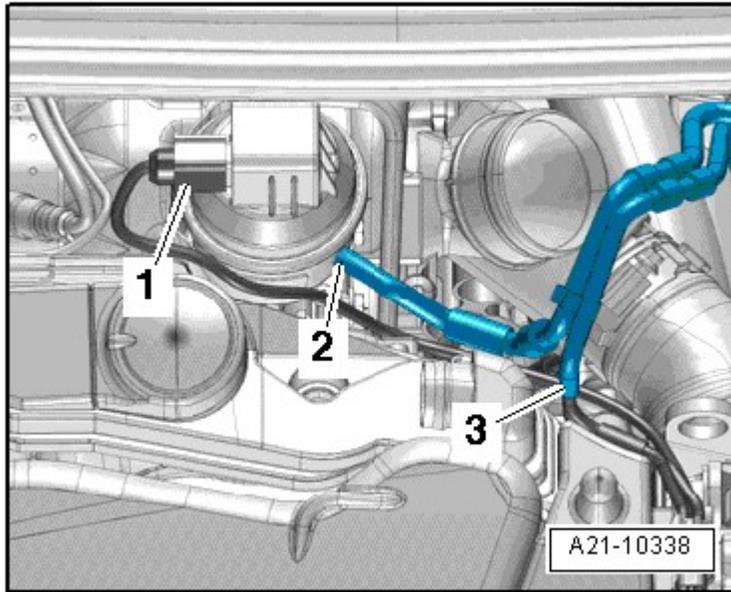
Identifying Turbocharger Vacuum Diaphragm
